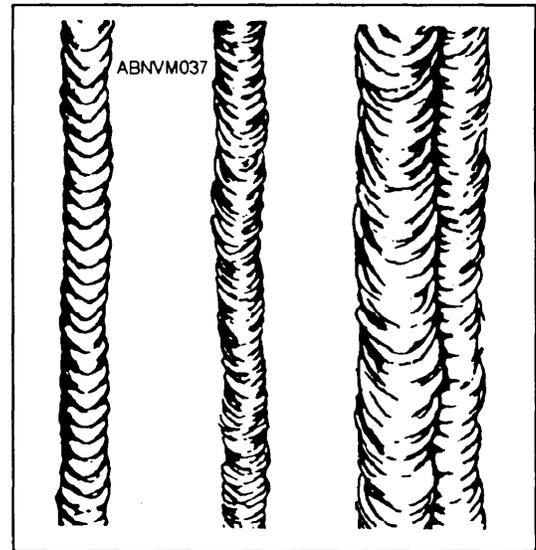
Visual inspection standards for GTA welds.
